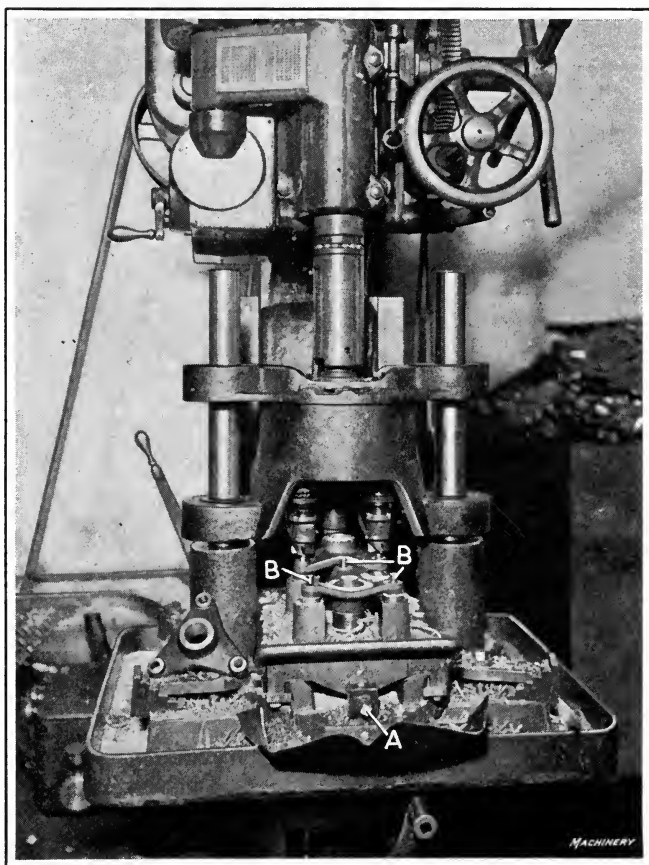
High-duty Drilling Machine equipped with a Two-station Work-holding Fixture and Special Three-spindle Head for Spot-facing
